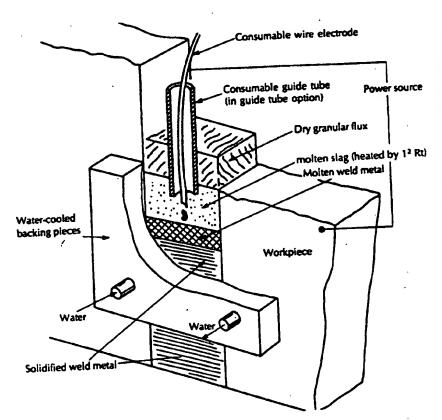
Schematic of the electroslag welding (ESW) process, including torch, weld, weld mold, and electrical hookup (From *Joining of Advanced Materials* by R. W. Messler, Jr., Figure 6.22, page 215, published in 1993 by and used with permission from Butterworth-Heinemann, Woburn, MA.)
